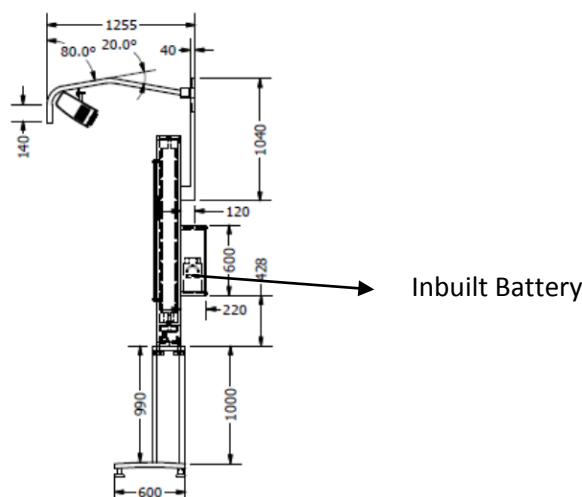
Side View of the Dry-Wipe Board with Dimensions in mm
